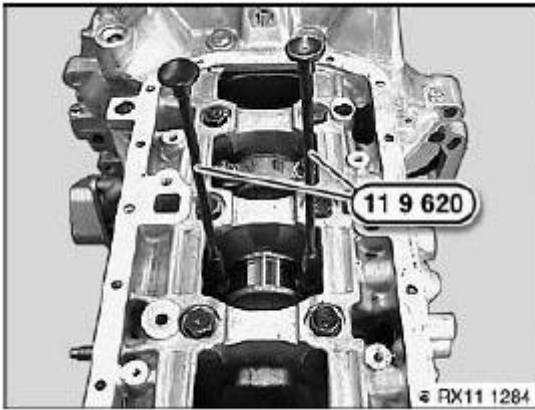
Attaching Special Tool (11 9 620) In Conrod Big End
